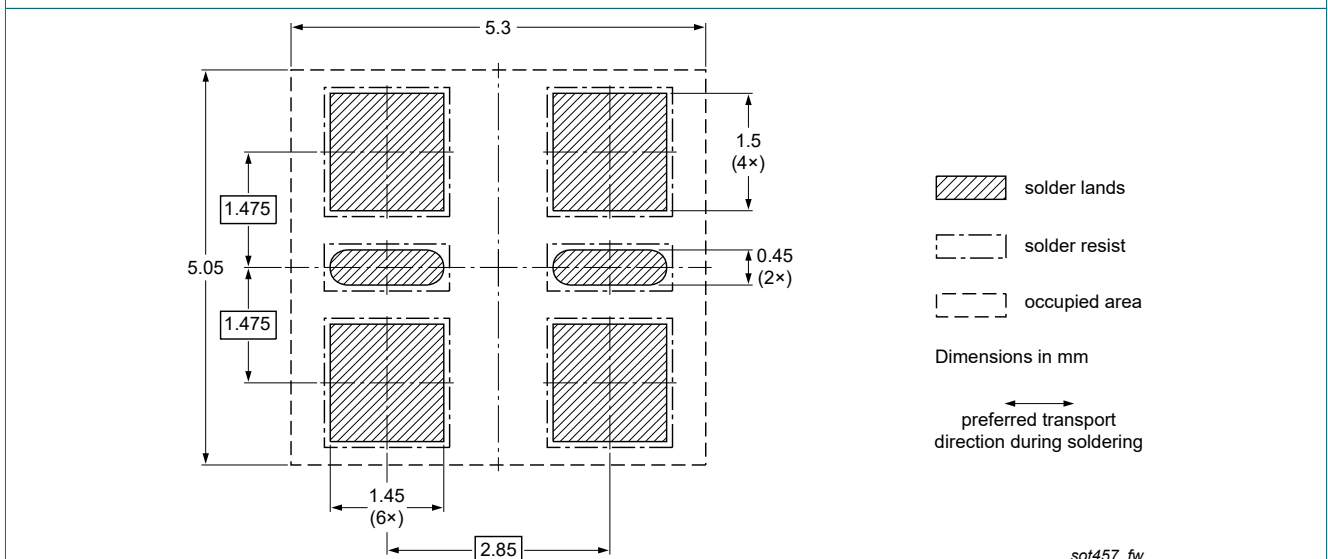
Wave soldering footprint for SC-74; TSOP6 (SOT457)
